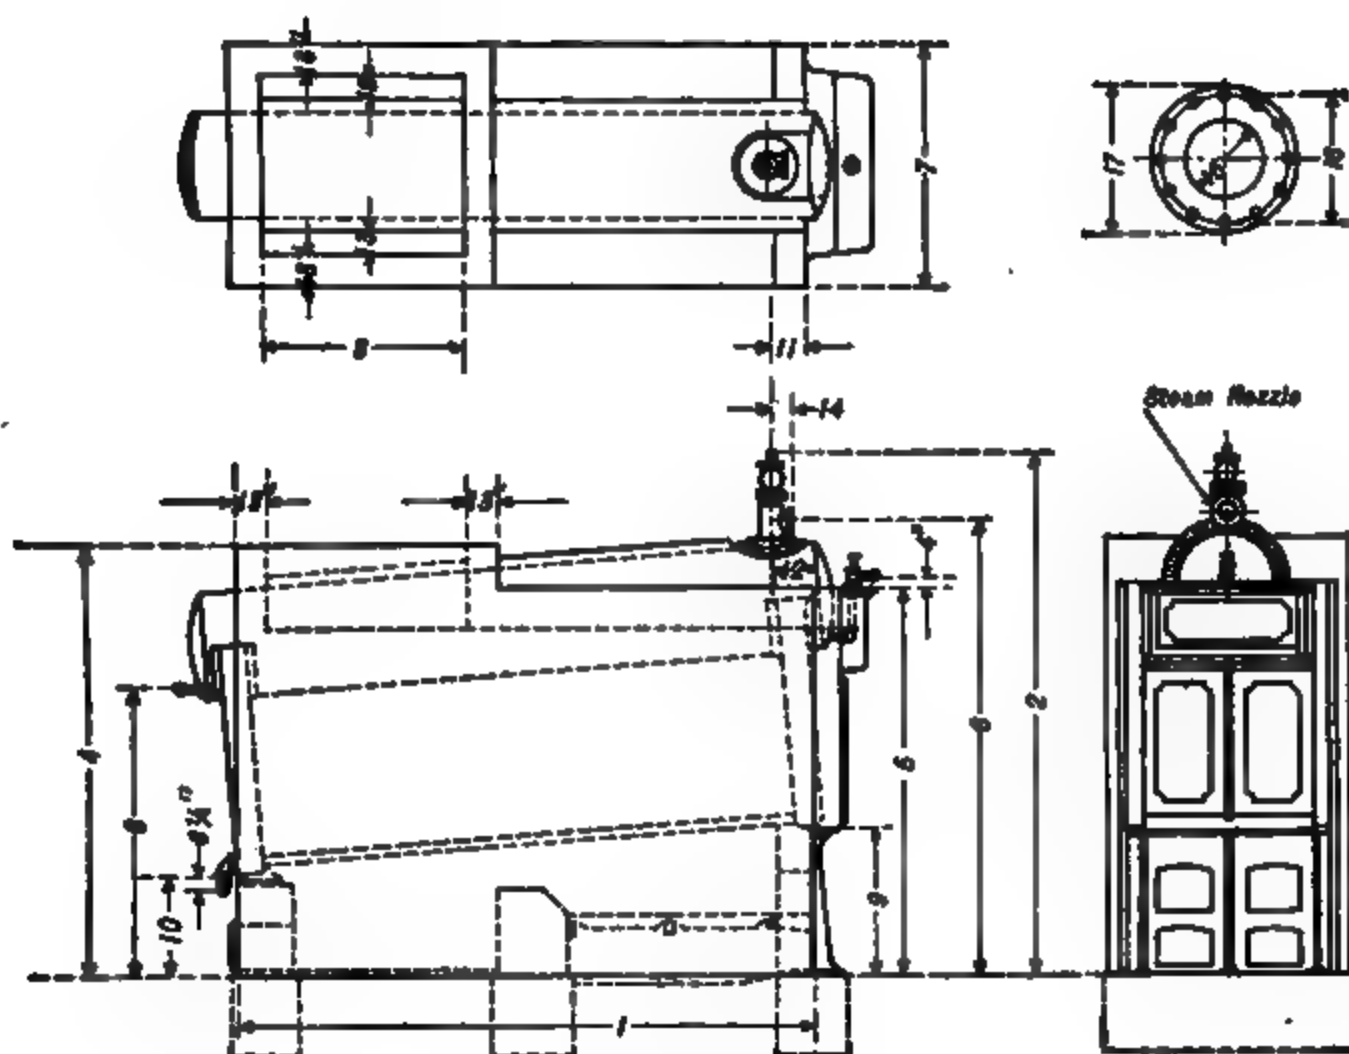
DIMENSIONS OF HERRN SINGLE-DRUM BOILERS.
